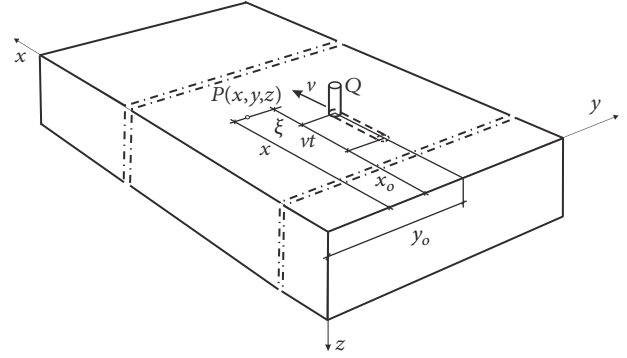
Single-pass arc overlaying welding scheme.
